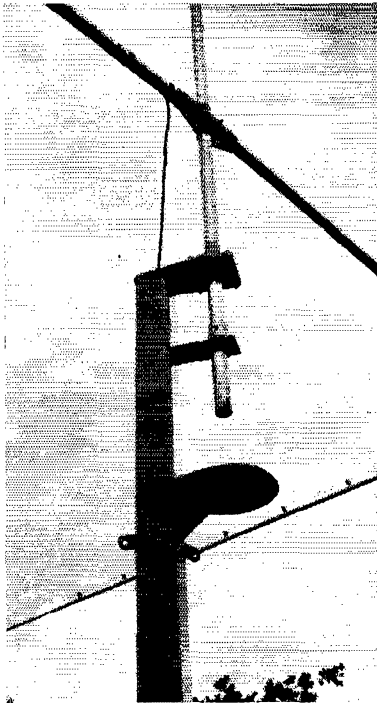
Sketch showing plates for mounting shaft bearings and the rotator at the top of the 4-inch column. The plates are made of  $\frac{3}{16}$ -inch steel. Top and bottom plates have triangular braces of the same material. The sleeve bearing is welded in a clearance hole in the center plate.
